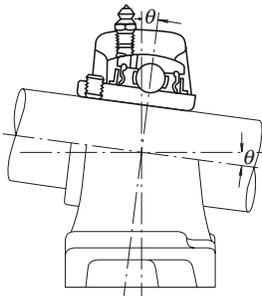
Permissible Misalignment of Ball Bearing Units
